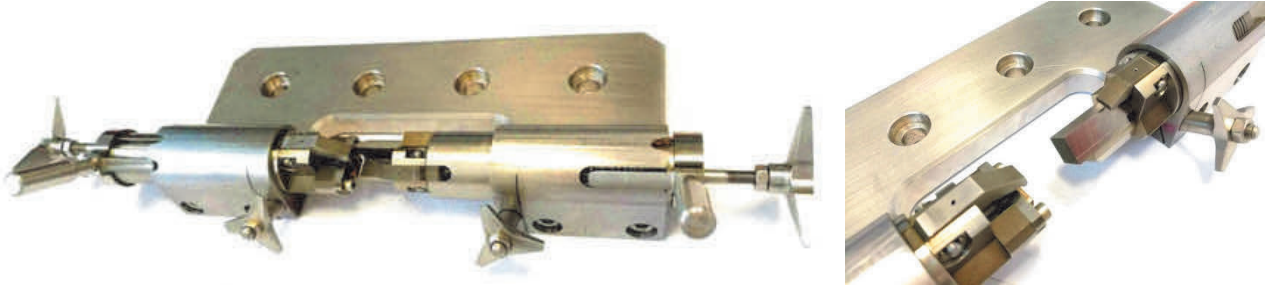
Holding device for miniaturized compact test samples fabrication (detail on the right side)
